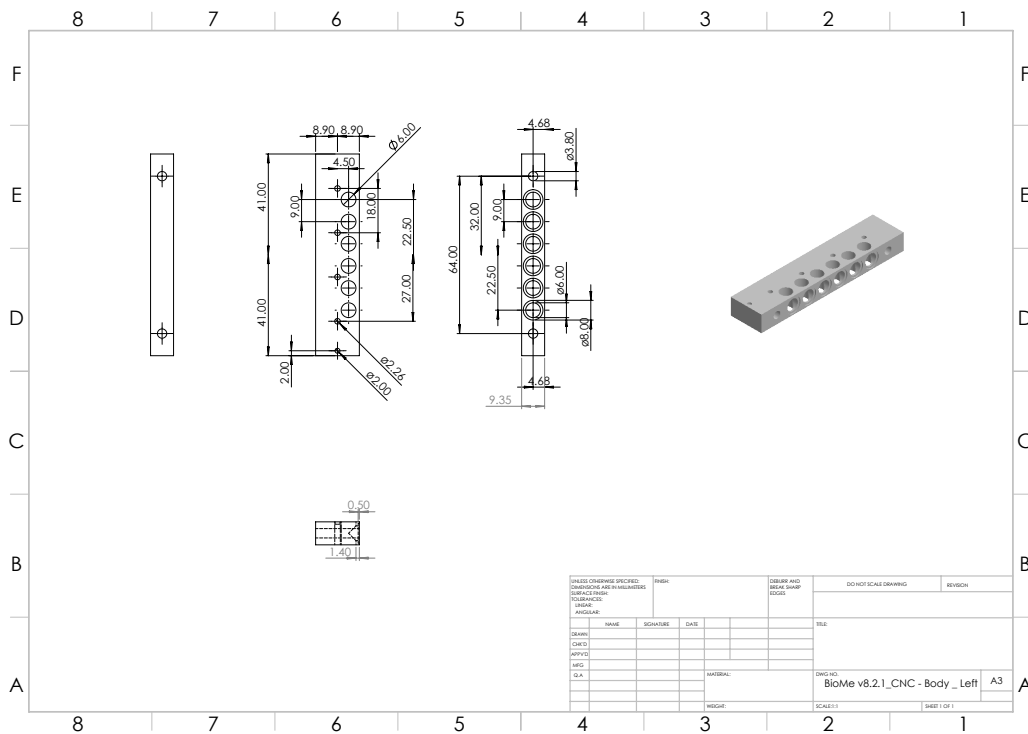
Left body segment SolidWorks CAD drawing used in final BioMe iteration (v8)
